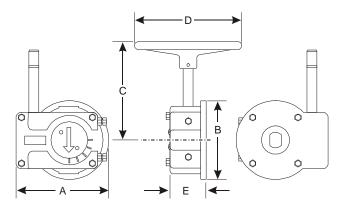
Dimensions for Gear-Operated Manual Hand Wheels (See Table 11.)
